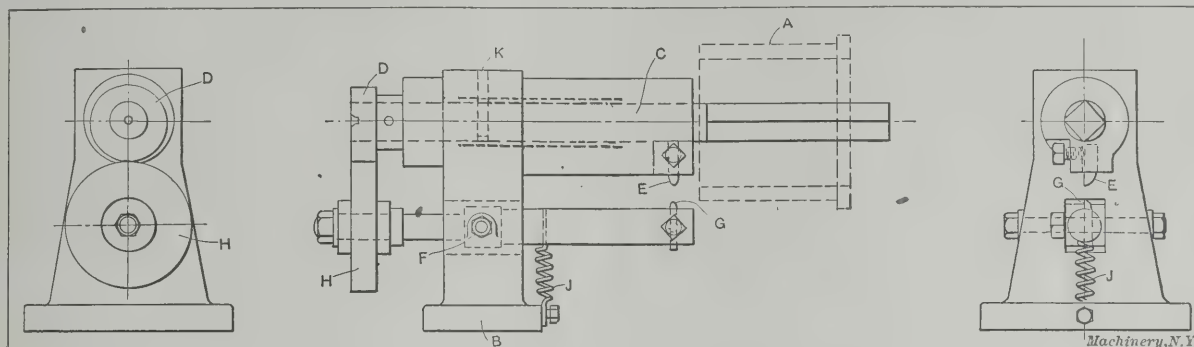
Tool for Boring and Turning Eccentric Rings simultaneously
